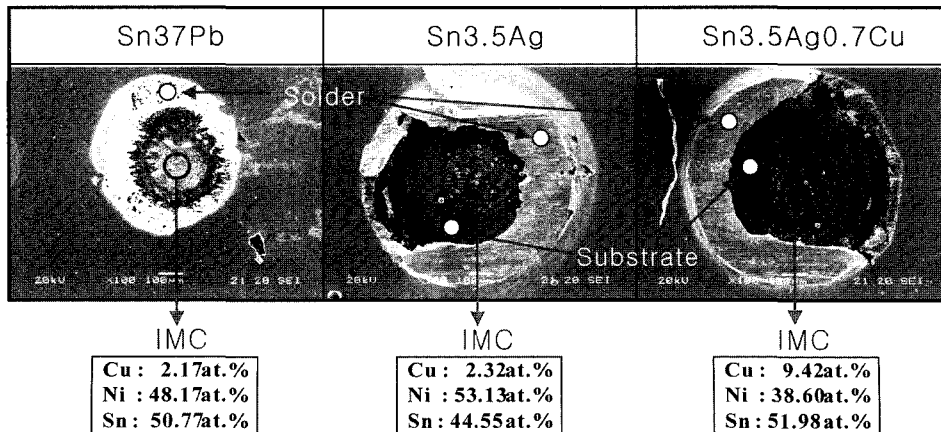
Fracture surface of solder ball bonded on thin-film UBM by plasma treatment after shear strength test.
